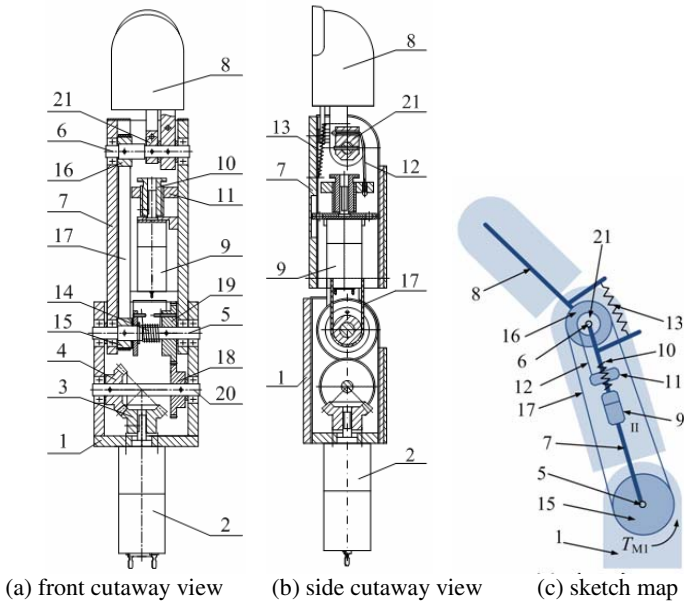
The GCUA finger with 2 joints. 1-base; 2-first motor; 3-first bevel gear; 4-second bevel gear; 5-first joint-shaft; 6-second joint-shaft; 7-middle-segment; 8-terminal-segment; 9-second motor; 10-screw; 11-nut; 12-flexible drawstring; 13-return spring; 14-active spring; 15-active pulley; 16-passive pulley; 17-belt; 18-first straight gear; 19-second straight gear; 20-base joint-shaft; 21-rope pulley.
